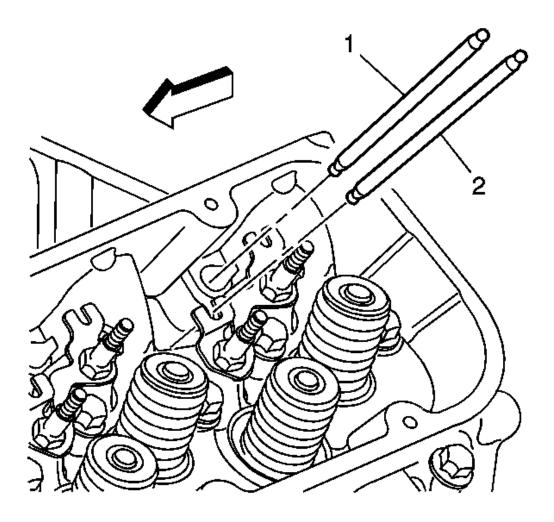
View Of Intake & Exhaust Valve Pushrods Courtesy of GENERAL MOTORS CORP.
